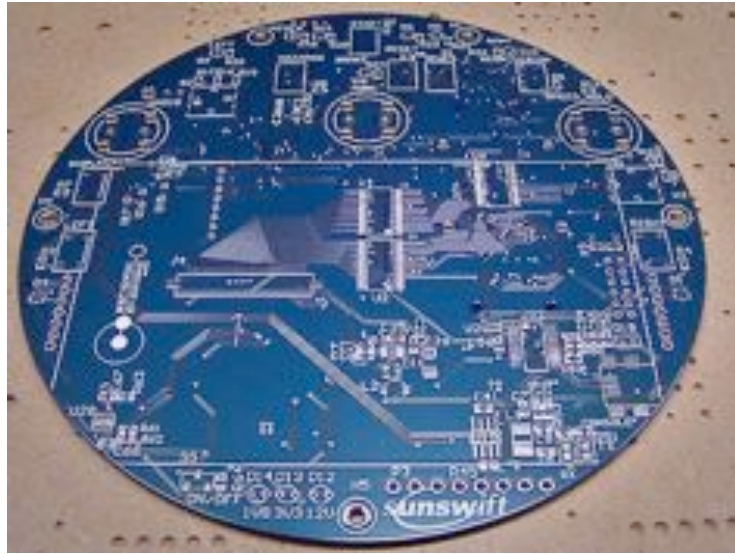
Photograph of top side of unpopulated version 2 PCB.
